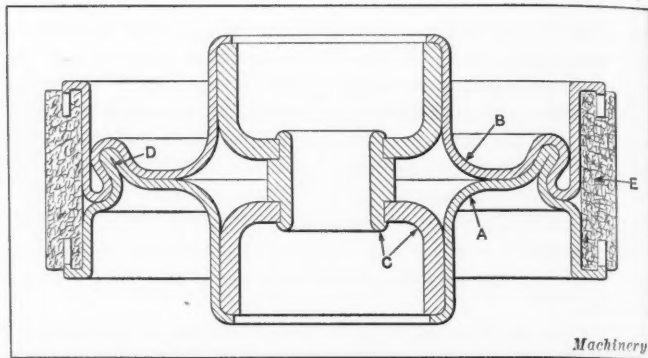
Sectional View of Zamboni Interlocking Sheet-metal Roller Skate Wheel
